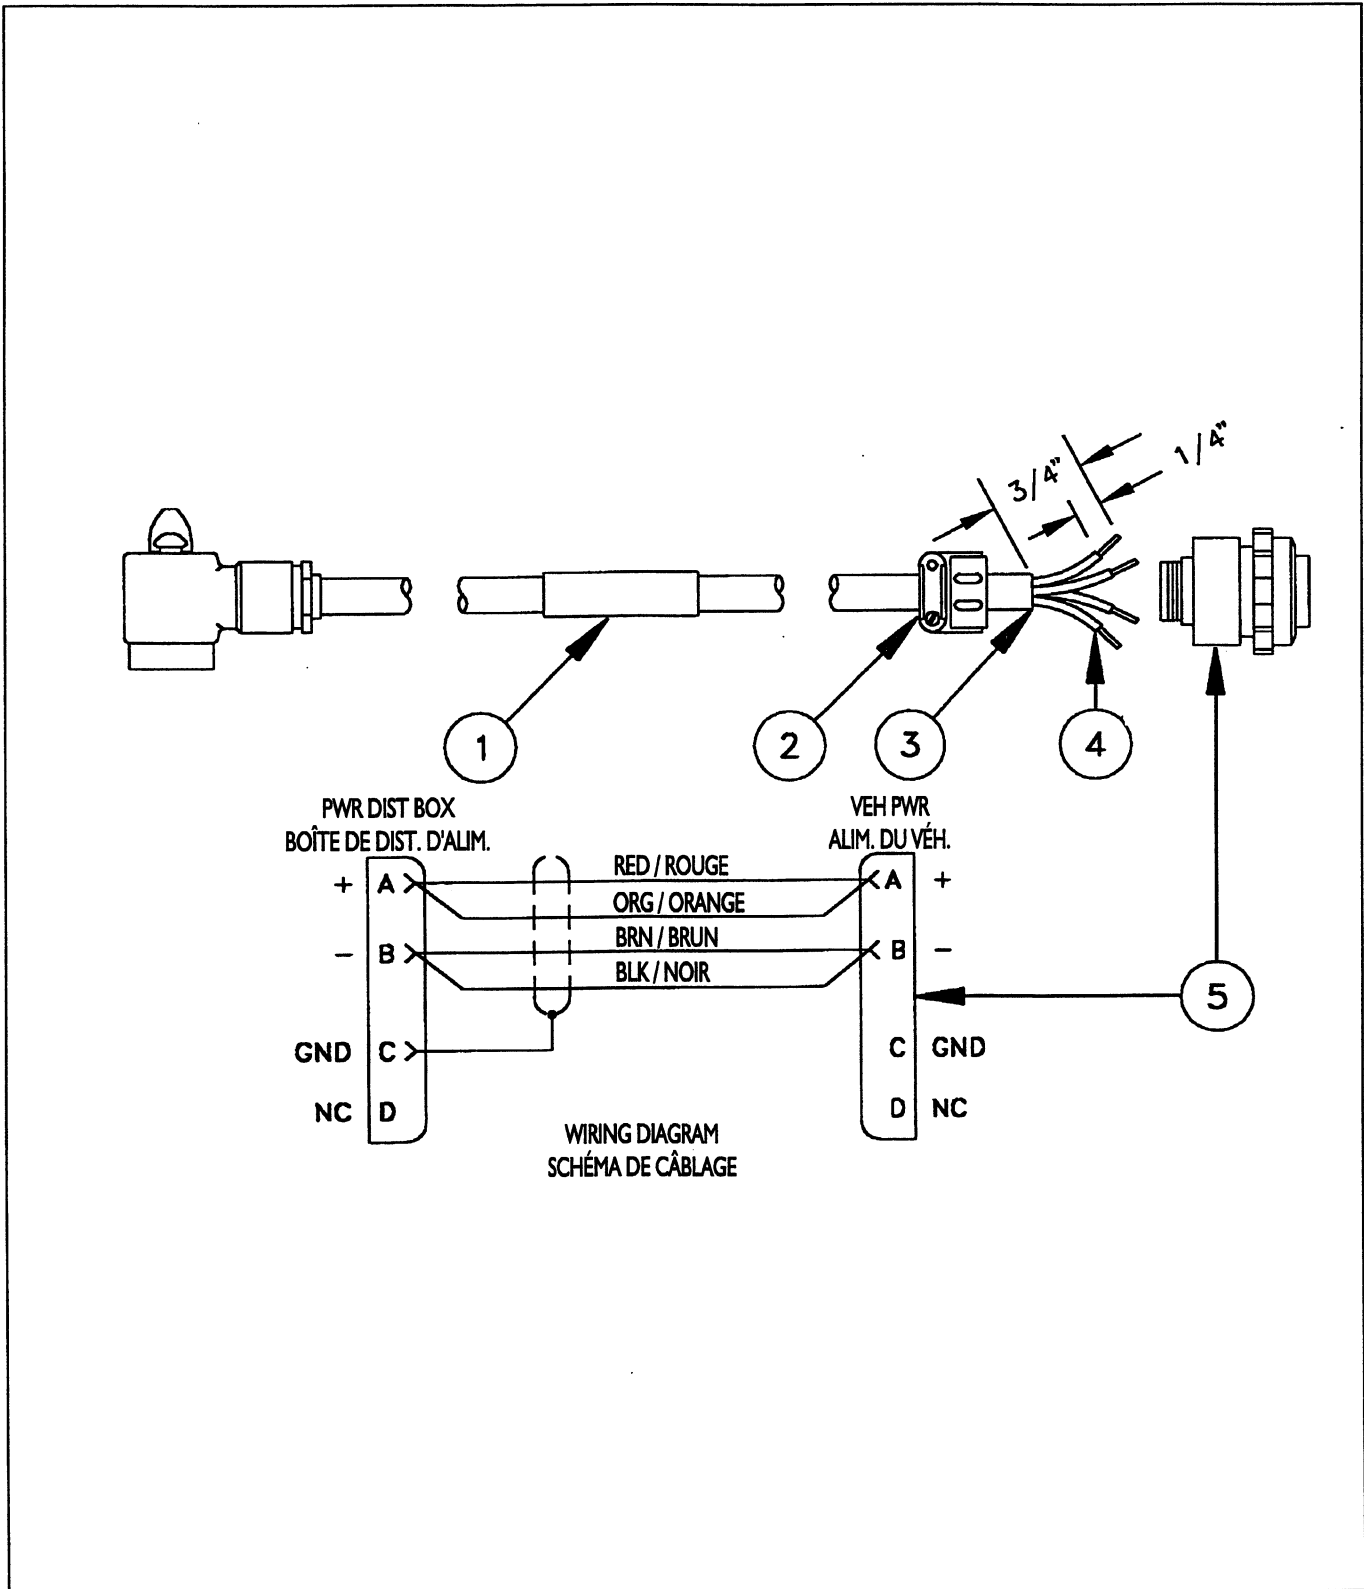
(Sheet 1 of 2) Power Cable Assembly
